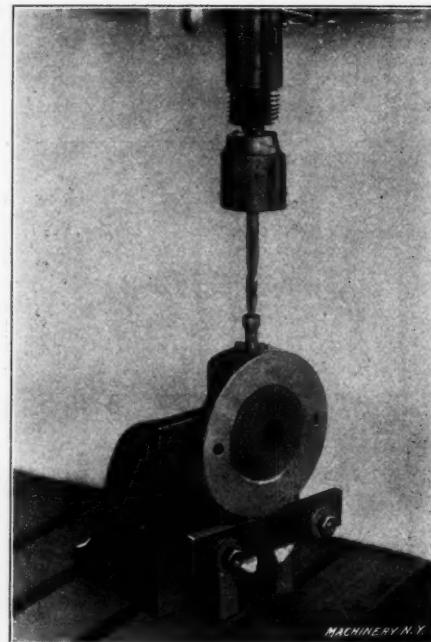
Drilling the Holes in the Swivel in Correct Relation to the Hole in the Tool Slide
